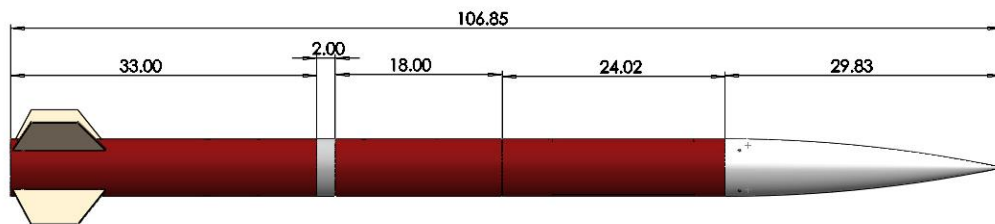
Dimensioned Drawing of Launch Vehicle
